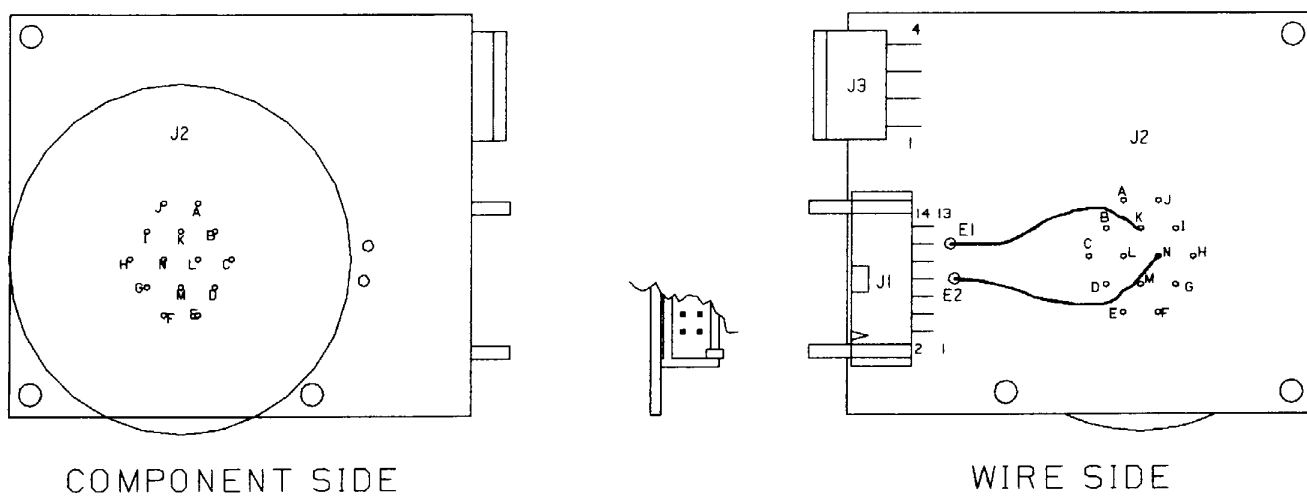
A8 Connector PWB Assembly (10208-5300) Component Locations
